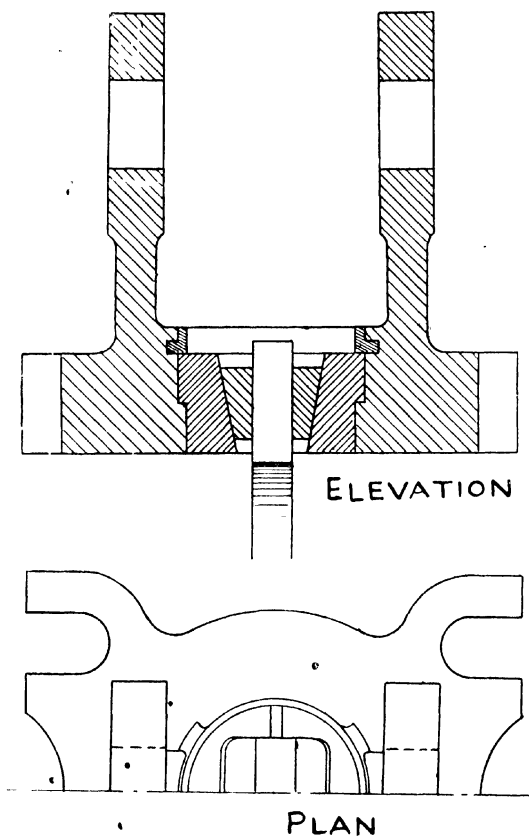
TESTING MACHINE HINGED SHACKLES WITH WEDGE GRIPS.
